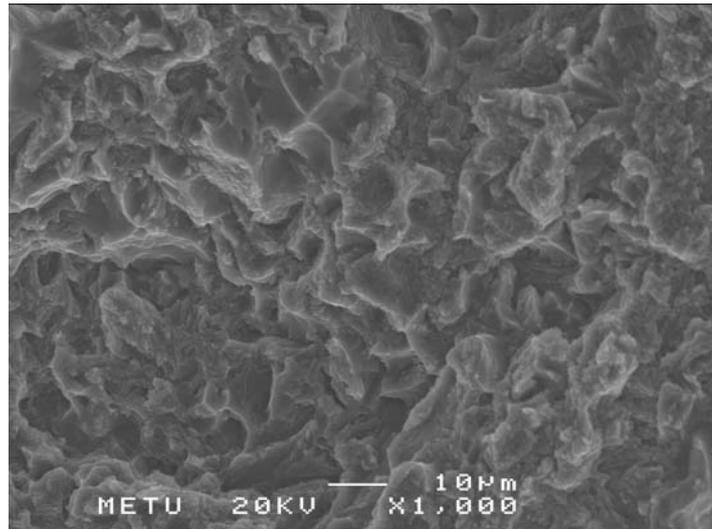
Fracture surface of AlSi10Mg0.8 alloy squeeze cast at 750 °C
